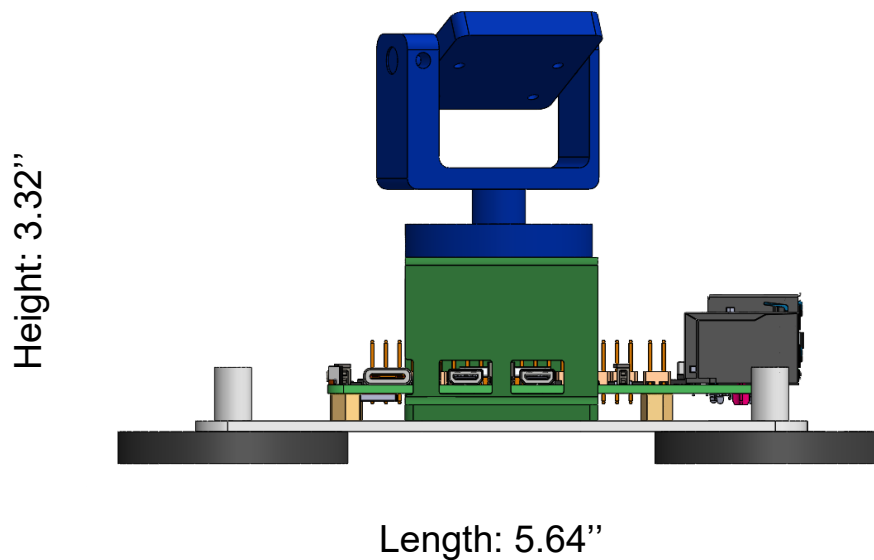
Initial Prototype for Raspberry Pi 5 and Camera, Side View
